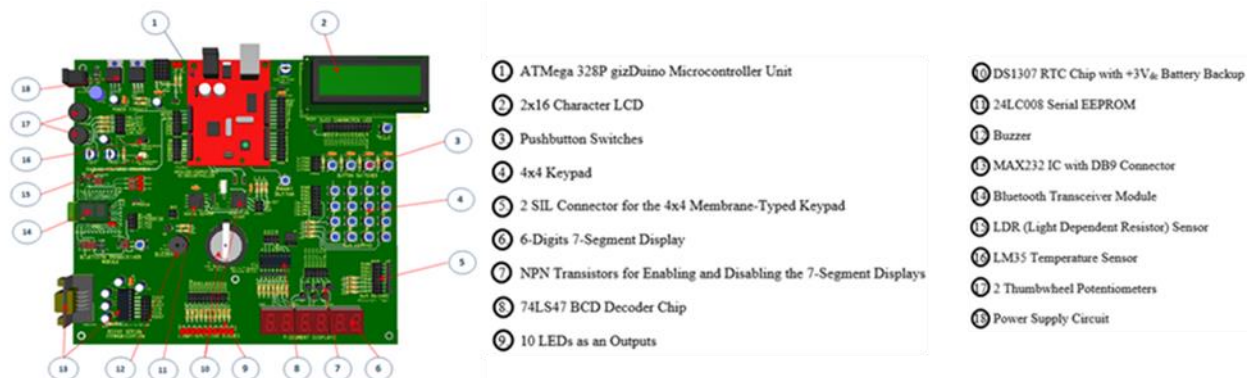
The Final Design of the Trainer Board with Detailed Parts
